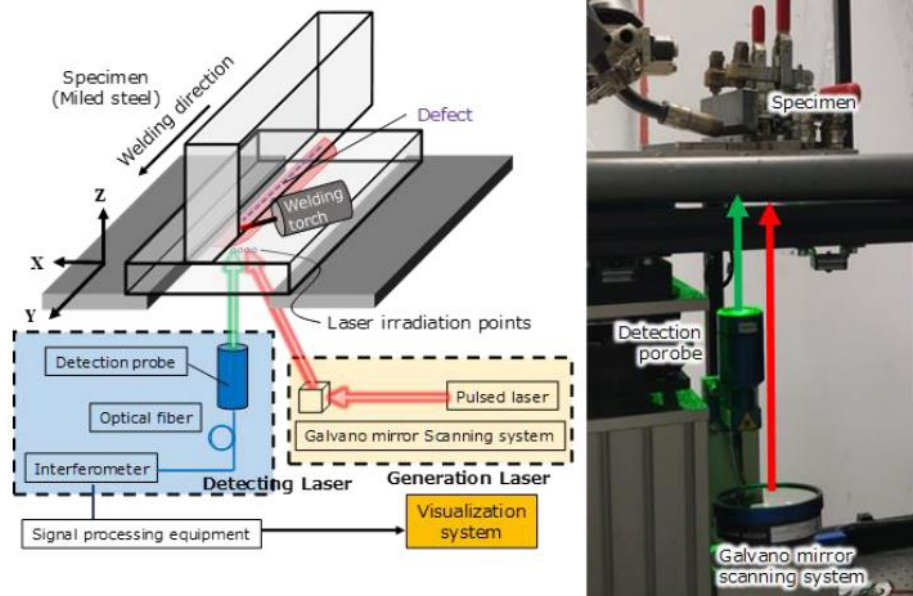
Schematic and experimental setup using laser ultrasonic technique for corner joints [170]
